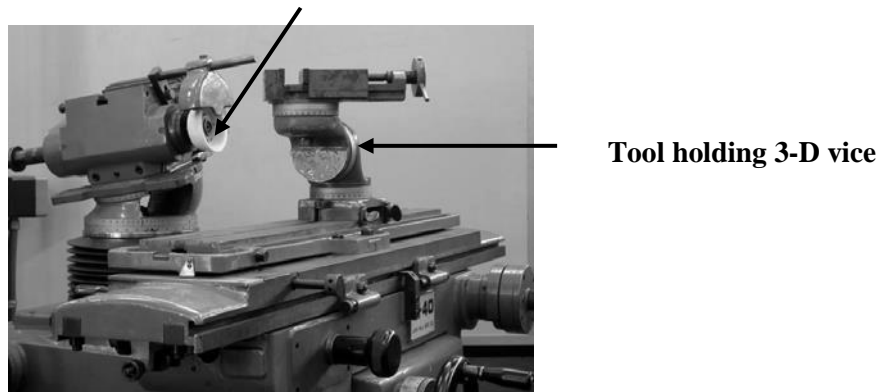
Pictorial view of a tool and cutter Grinder
